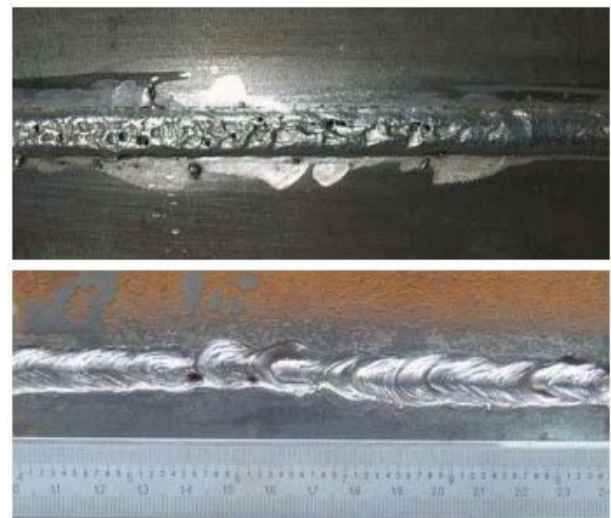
Joints welded underwater: a) S355J2G3 steel, flux core darc welding using the local dry chamber method, visible numerous gaspores; b) S420G2+M steel, wet MMA welding, visible undercut sandgaspores[x]
